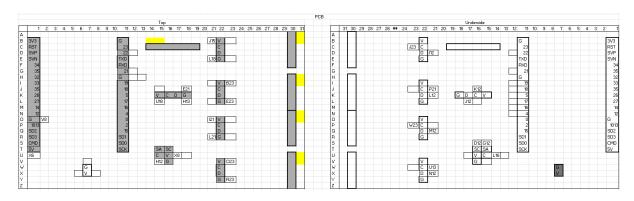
Mk.4 (ESP-32 5 Gauges) PCB Schematic
